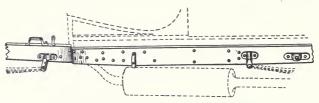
Side Bar of Frame, Showing Excessive Riveting.
